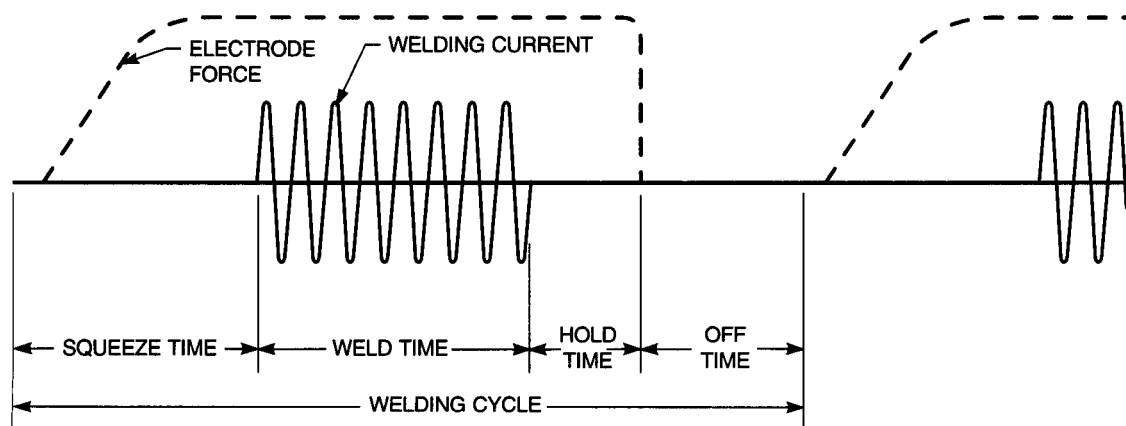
Single-Impulse Resistance Spot Welding Schedule
